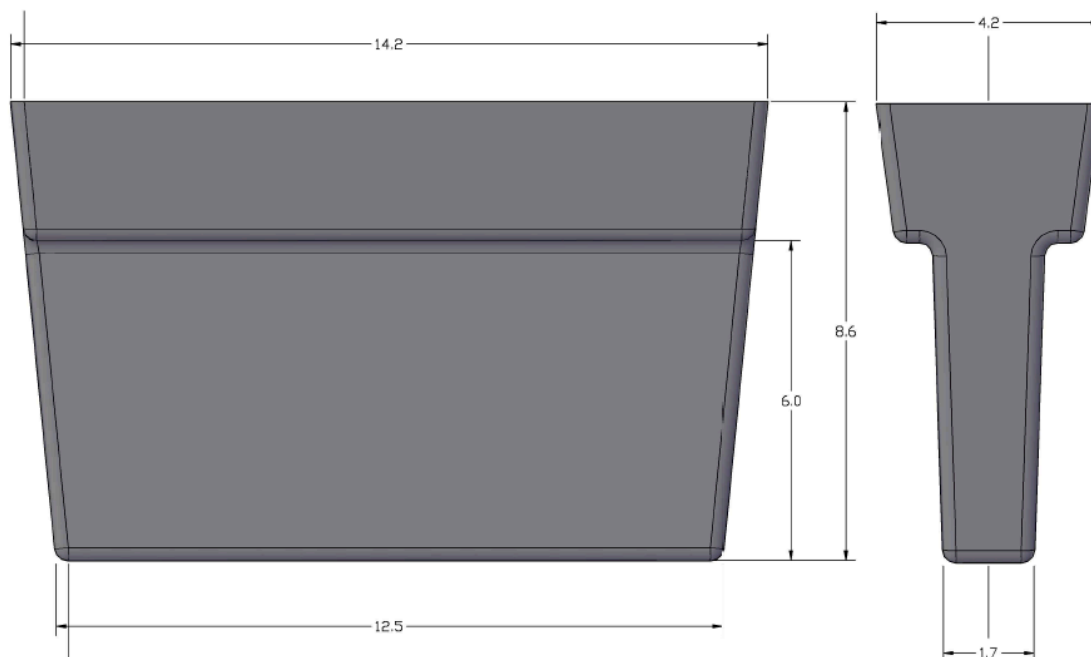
CAD drawing of keel block casting with dimensions given in centimeters. The riser was located at the middle of the top of the casting.
